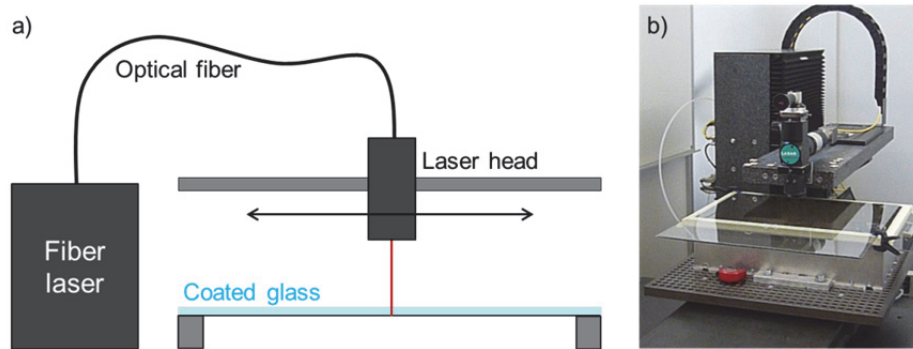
6 a) Diagram of the laser scribing equipment. The sample is on a X-Y table, the laser head is motionless. b) Photograph of the device used to make the first prototypes.
